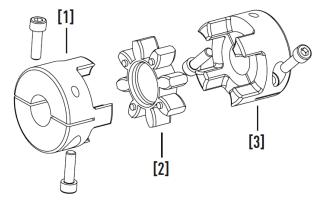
Coupling assembly variant 2: Clamping hubs with two clamping bolts
